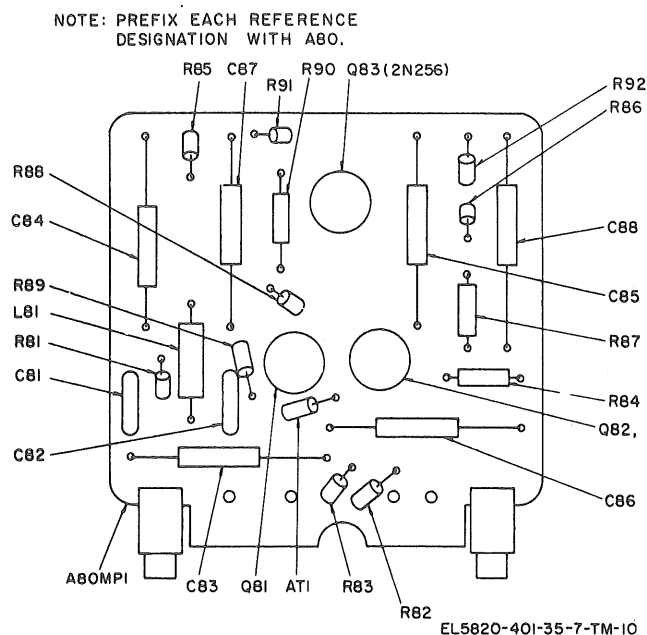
Microphone amplifier A80, printed circuit board, assembly A80A1; parts location; latest version.
